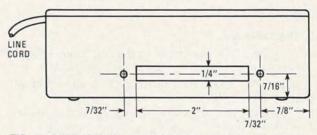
DIMENSIONS ARE PROVIDED here for openings in the connector. See text for additional explanation.
